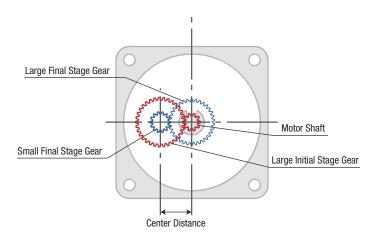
Concentric Structure of Conventional Parallel Shaft Gear Design (Front)
